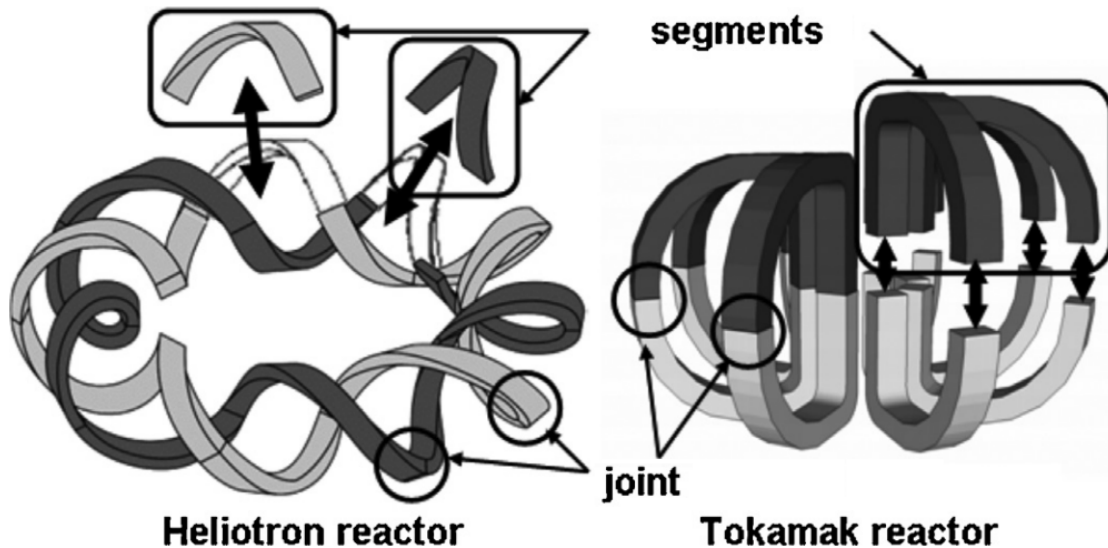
Remountable magnet concepts for tokamak and heliotron devices, to fabricate large-scale power-plant size coils. The higher cryogenic stability of HTS may allow to fabricate such magnets sections and assemble them via joints. Apart from assembly itself, being the magnets remountable allows for faster maintenance campaigns and fix scenarios in case of damage [35] .
